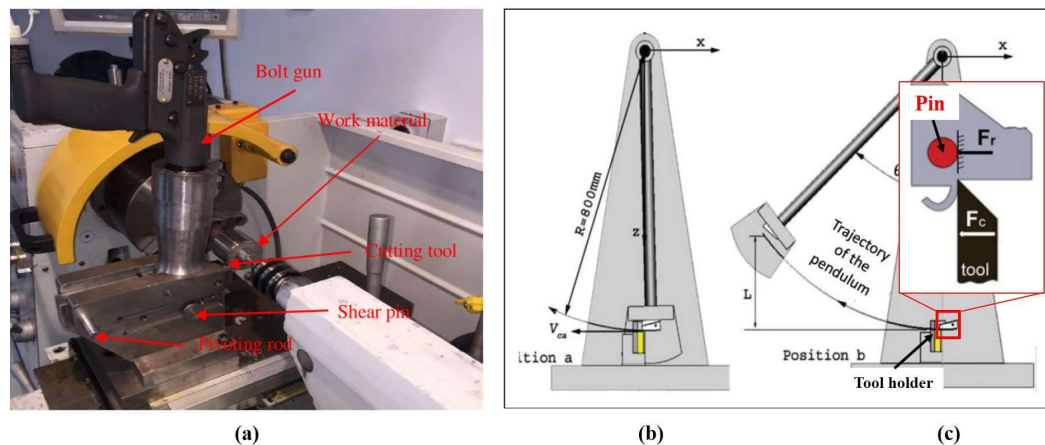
Examples of two quick-stop devices for attaching the chip on the workpiece. (a) Stop the movement of the cutting tool by shear pin [185]; (b) Stop the workpiece by breaking the weak point of the sample [186].
